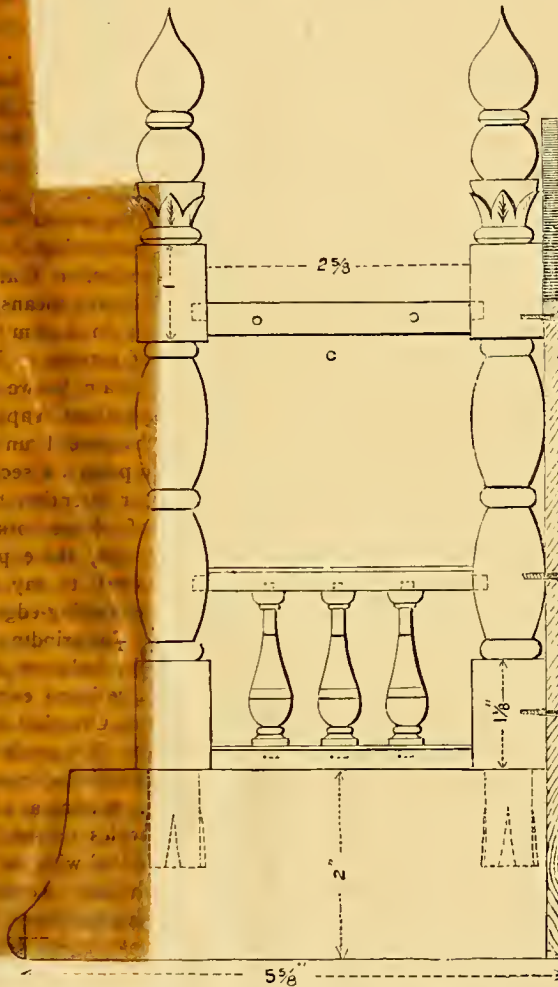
END ELEVATION OF CLOCK HOUSE WITHOUT ROOF.
